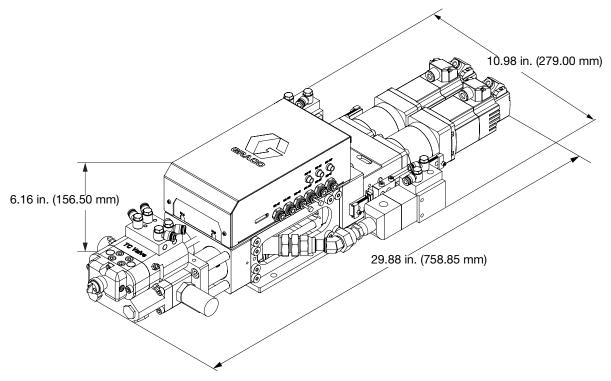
PR-Xv Metering Unit Dimensions, Supply Pump Feed
